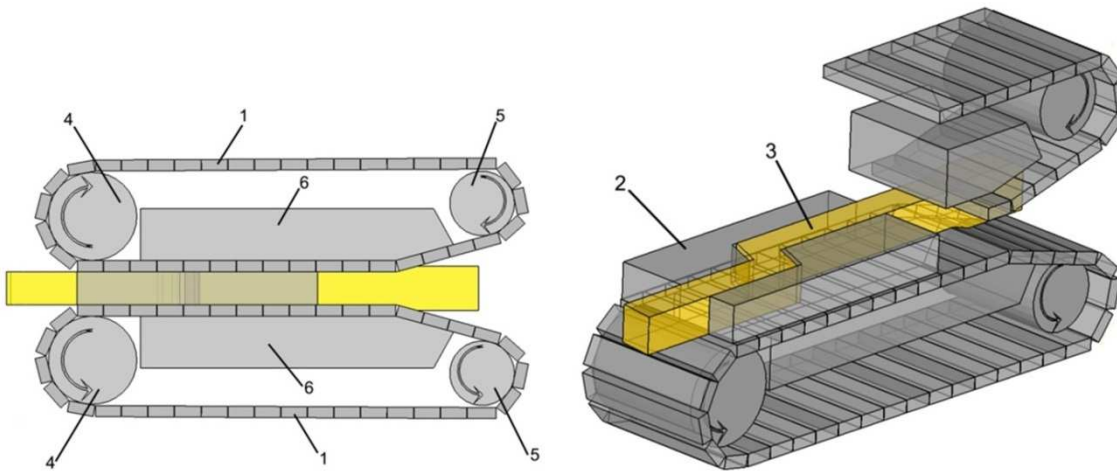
ECAP – Linex combined process: 1 - movable belt blocks, 2 – ECAP matrix, 3 – blank, 4 – idle pulleys, 5 - drive pulleys, 6 - fixed locking blocks
